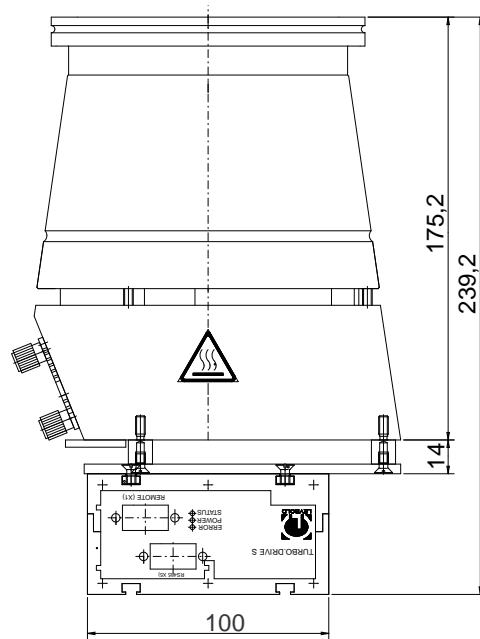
Dimensional drawing for the frequency converter and bottom of the pump, dimensions in mm
